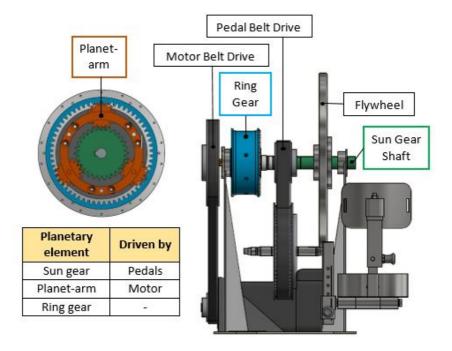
Planetary gear box (PGB) set-up with motor and pedal inputs
